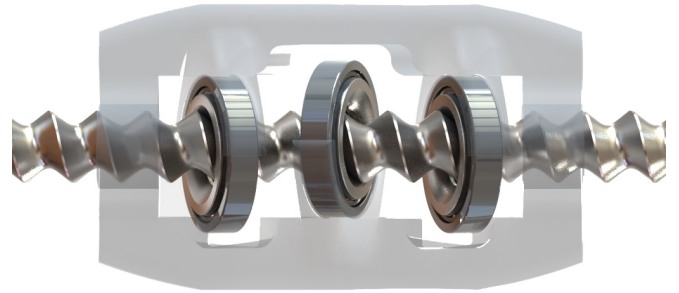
The ring screw mechanism. The three rings rotate freely inside ball bearings. The nut holding the bearings in place is shown translucent. The rings make a line contact with the rod that allows for perfect rolling.
